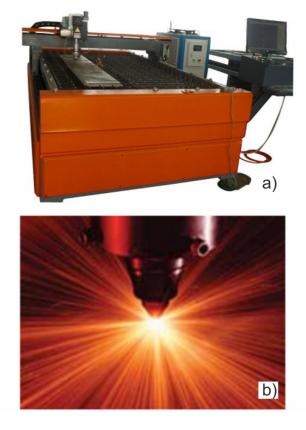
3015/4020 type optical fiber laser cutting machine (a) and its cutting head in operation mode (b).
